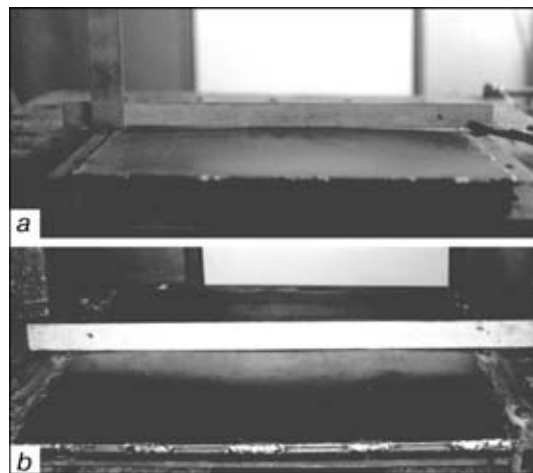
Welded specimen No.1 (450×450×2 mm) before (a) and after (b) automated thermal straightening
